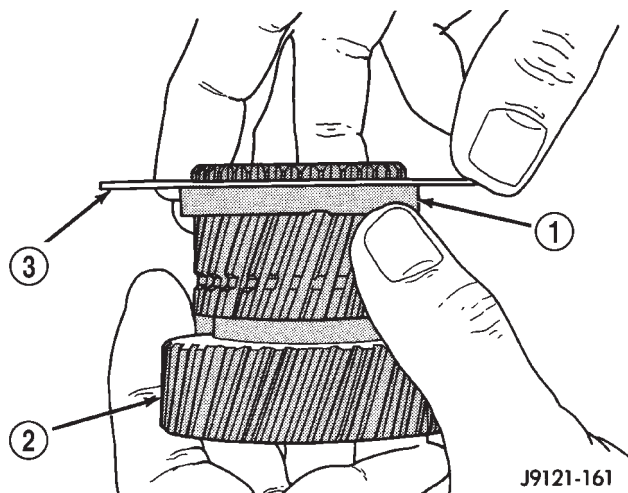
Installing Driving Shell Front Thrust Plate On Sun Gear
